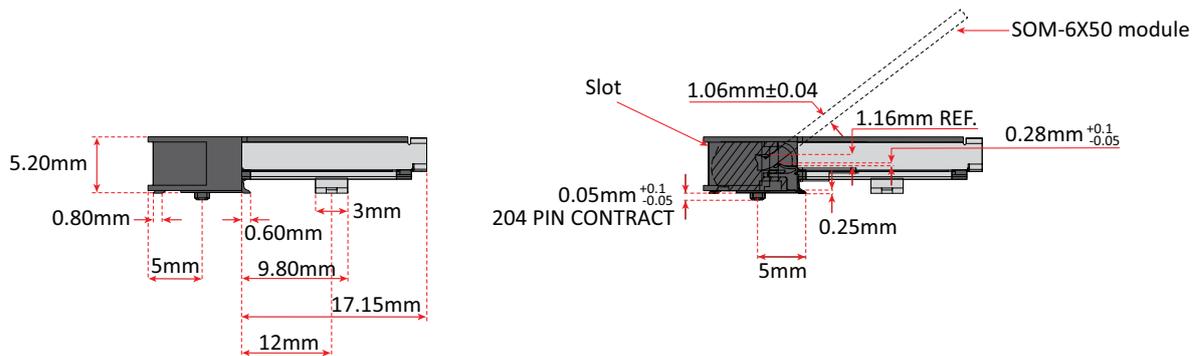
Dimensions of the SOM DDR3 SODIMM slot (side view)
